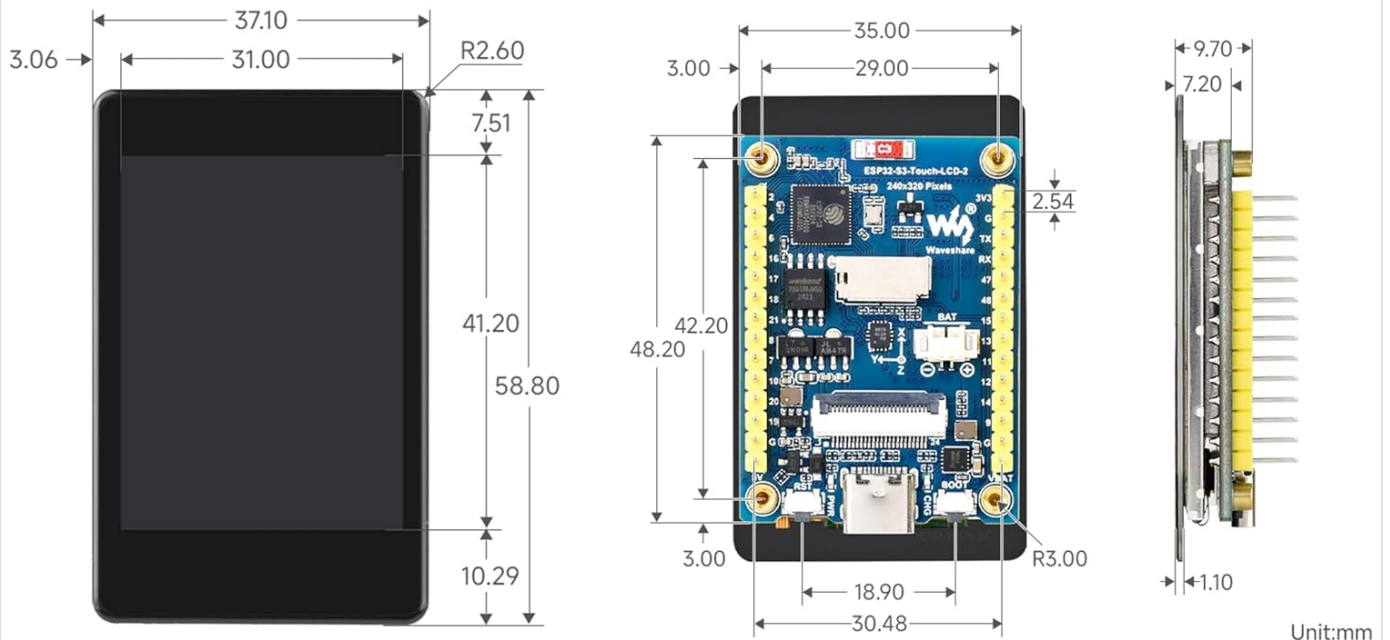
Mechanical outline dimensions of the development board, useful for integration into custom enclosures or projects.
